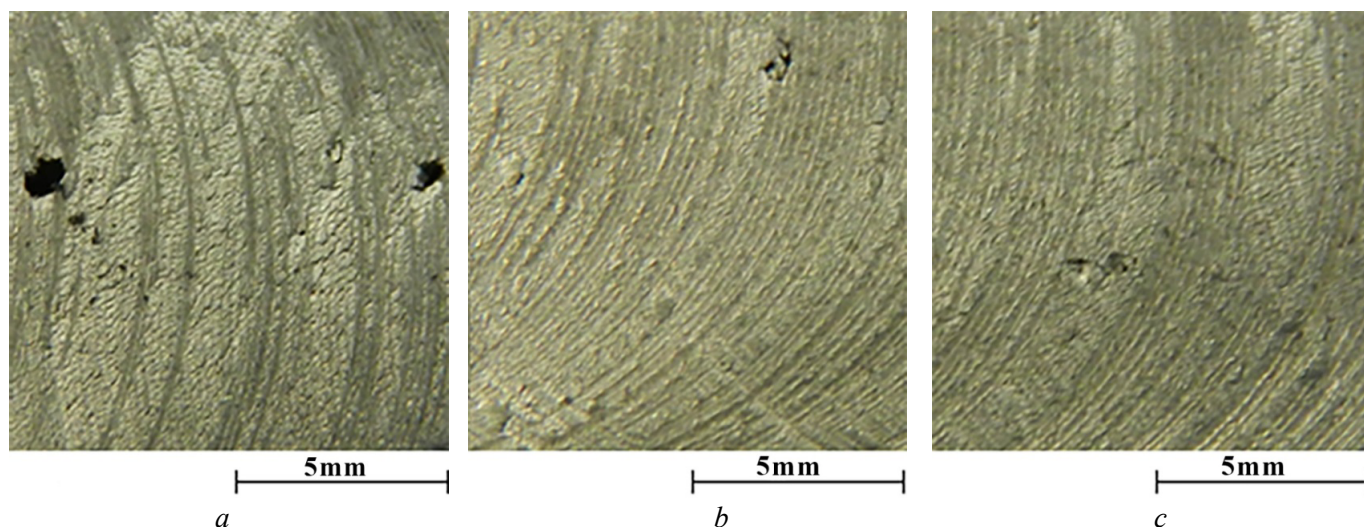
Macrosection of the “Handle”-type casting produced in a die with:
